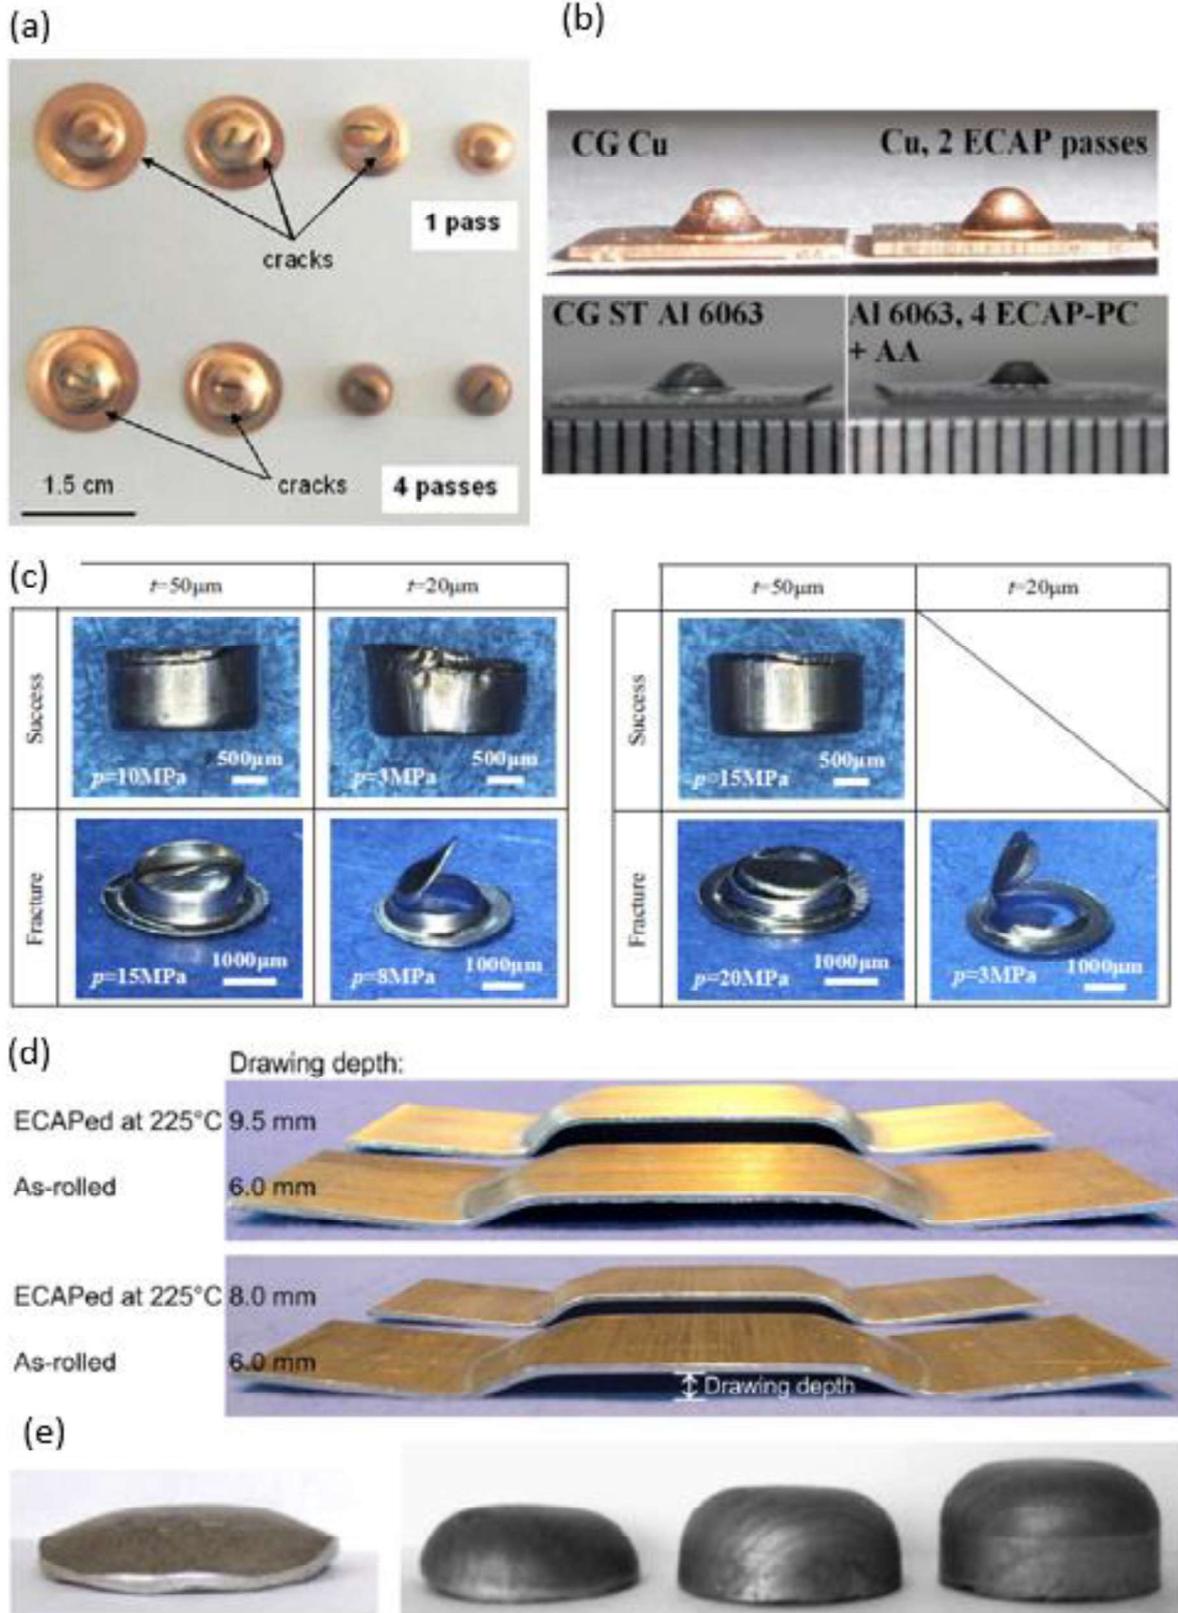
Examples of forming test of UFG sheets: deep drawing of UFG copper sheet [83] (a), small punch test of UFG copper and 6063 compared with CG counterparts [84] (b), deep drawing of UFG stainless steel (left) and CG steel (right) [88] (c), U-channel forming test of CG and UFG Mg alloy [58] (d) and deep drawing of CG (left) and UFG (right) AZ31 Mg alloy [82] (e)
